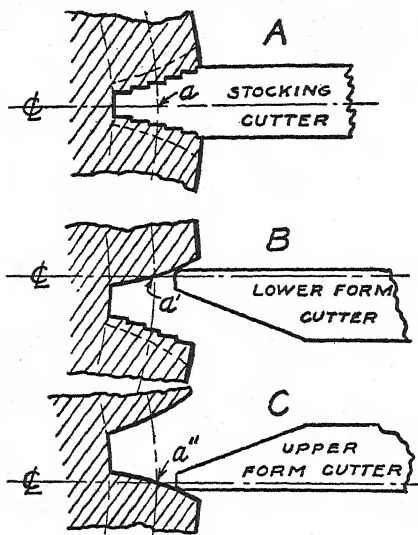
The Three Tools Used with Templates on the Gleason Form-Copying Gear Planer.
